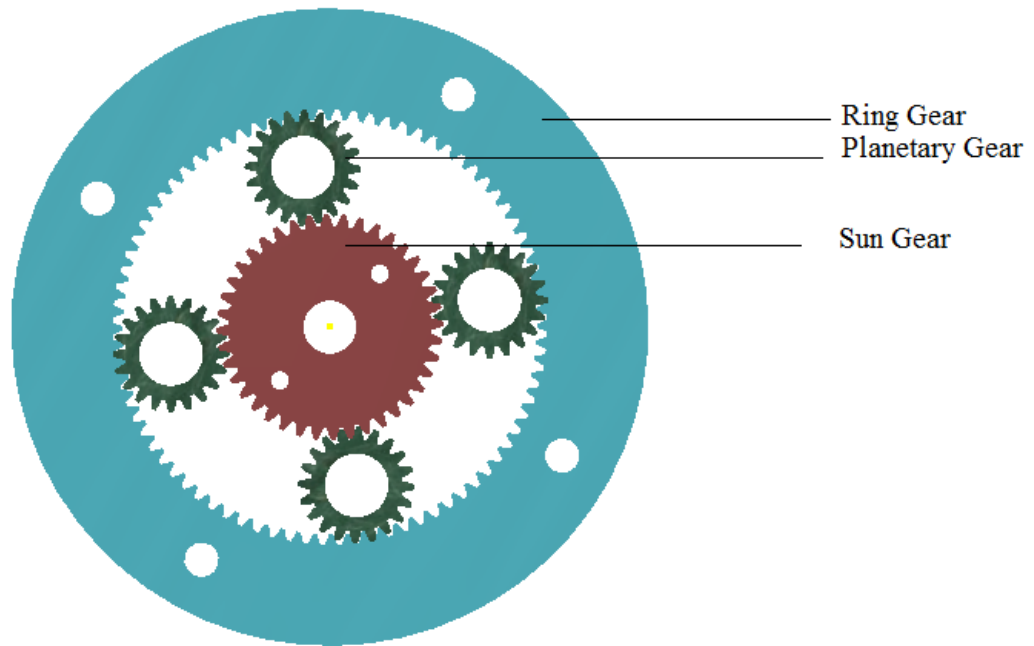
The Planetary Gear System Configuration and its components. The sun gear has input rotational speed (w) and the planetary gears have output rotational speed (w). However, the ring gear has a fixed position meaning that $w=0$. The figure is designed in Inventor Autodesk Software.
